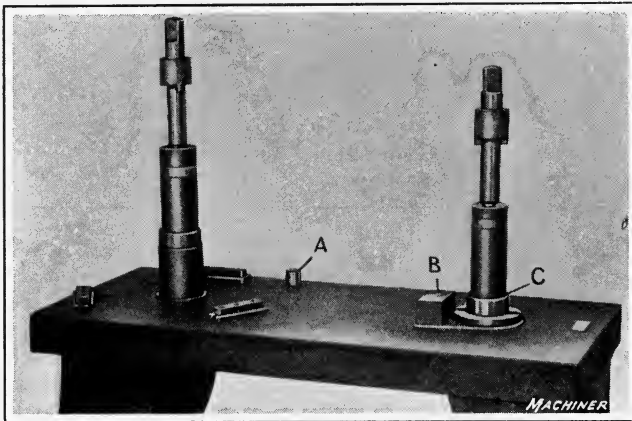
Fixture employed in reaming both Main Bearing Holes of the Transmission Case
